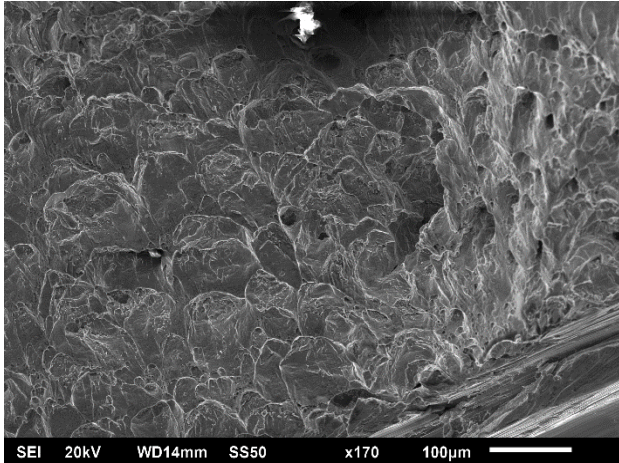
Fracture pattern of the crack shown in the previous figure. Fracture dimples are observed
